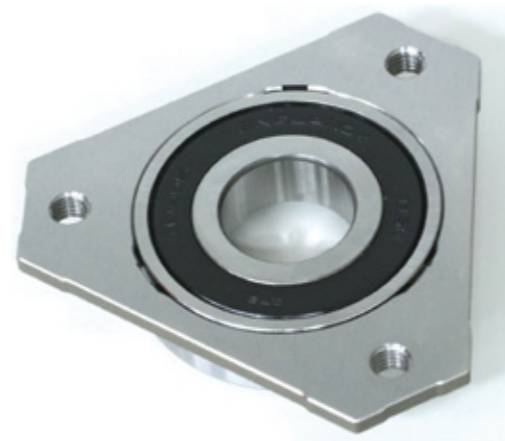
Ball bearing with a retainer plate for automobile transmissions
